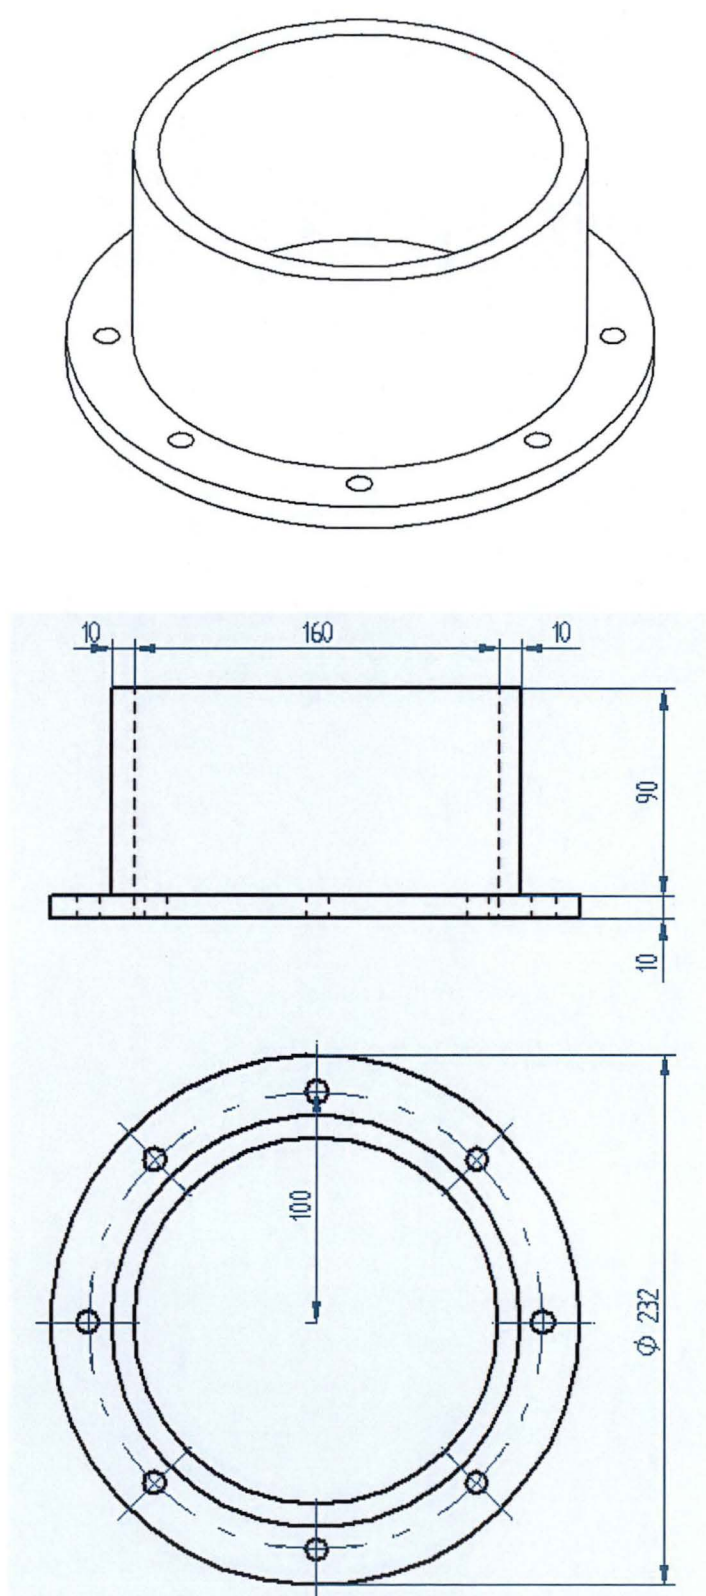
Inlet pipe holder connecting the 750mm pipe and the draft tube model (All dimensions in mm)
